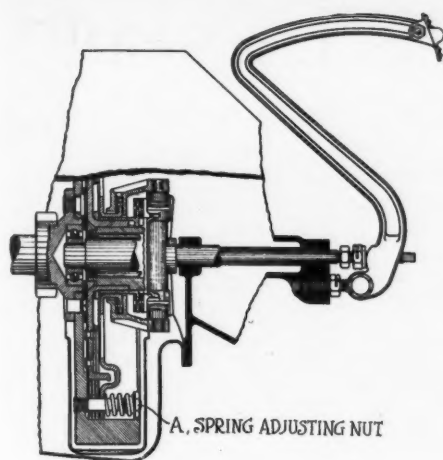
Sectional view of the 1914 Hupmobile clutch, showing one of the adjusting nuts A for increasing spring tension. There are eight of these nuts
